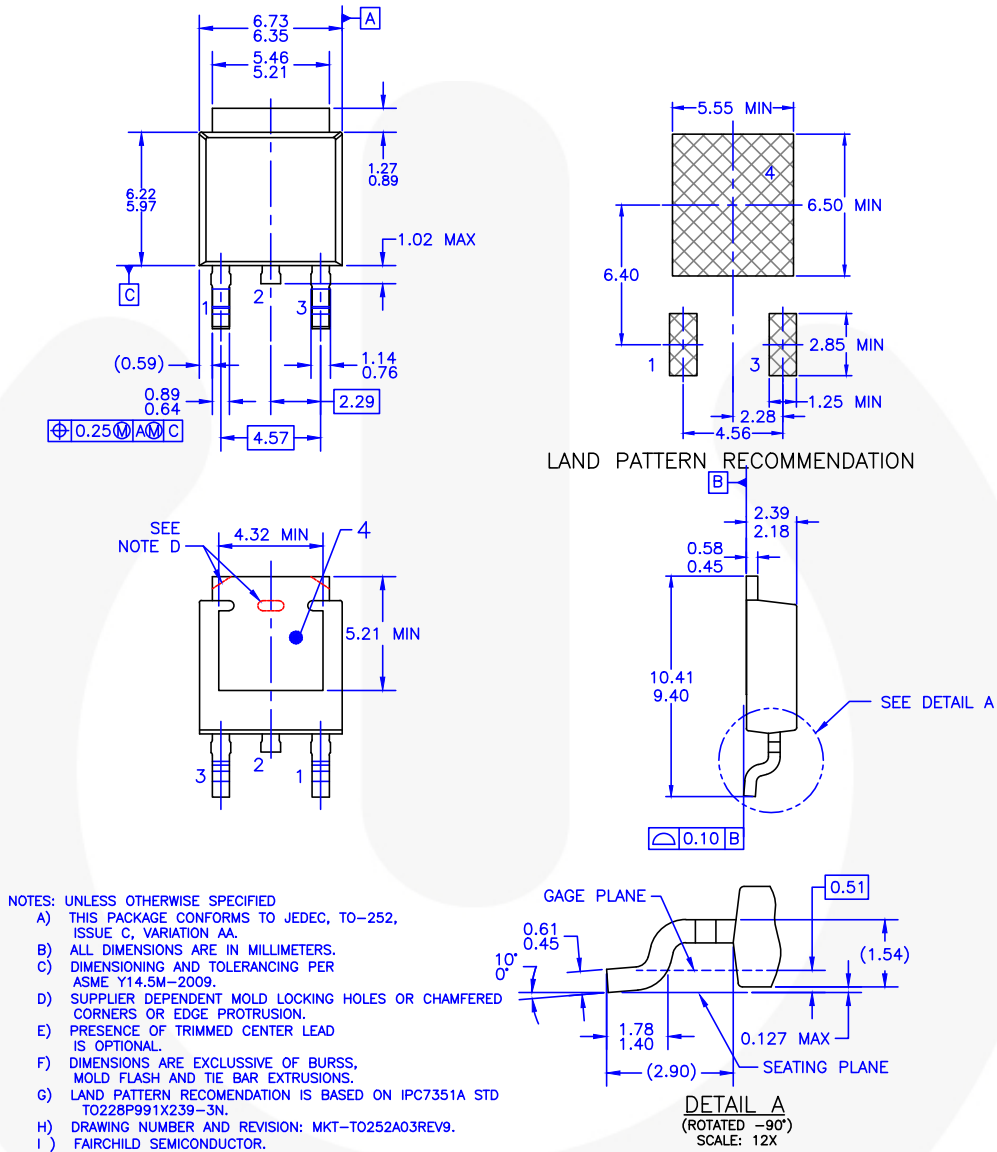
TO-252 (D-PAK), MOLDED, 3-LEAD, OPTION AA & AB
